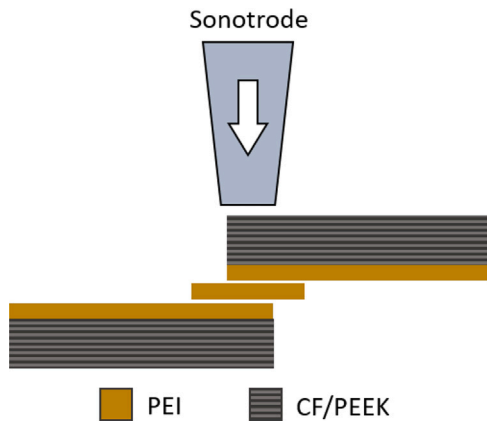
PEI and CF/PEEK specimens configuration for welding.
